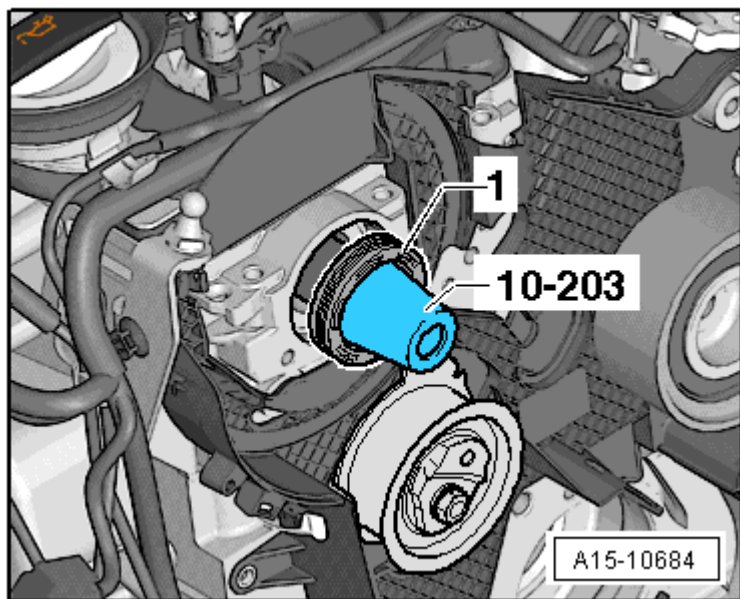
Identifying Seal -1- Pressed In To Stop Using Seal Driver 10-203
